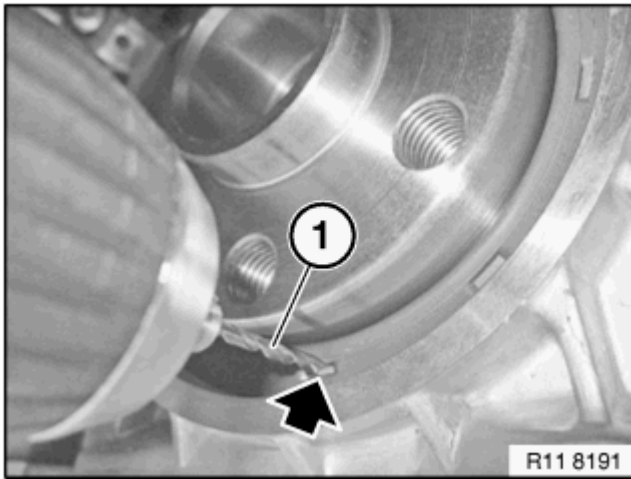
Drilling Hole In Radial Shaft Seal Using Drill
